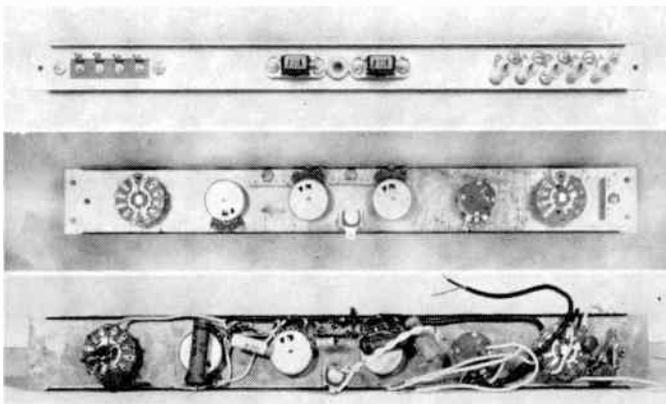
, left: The rear terminal strip, and two views of the control panel. Fig. 3, right: First assembly stage calls for mounting these parts
